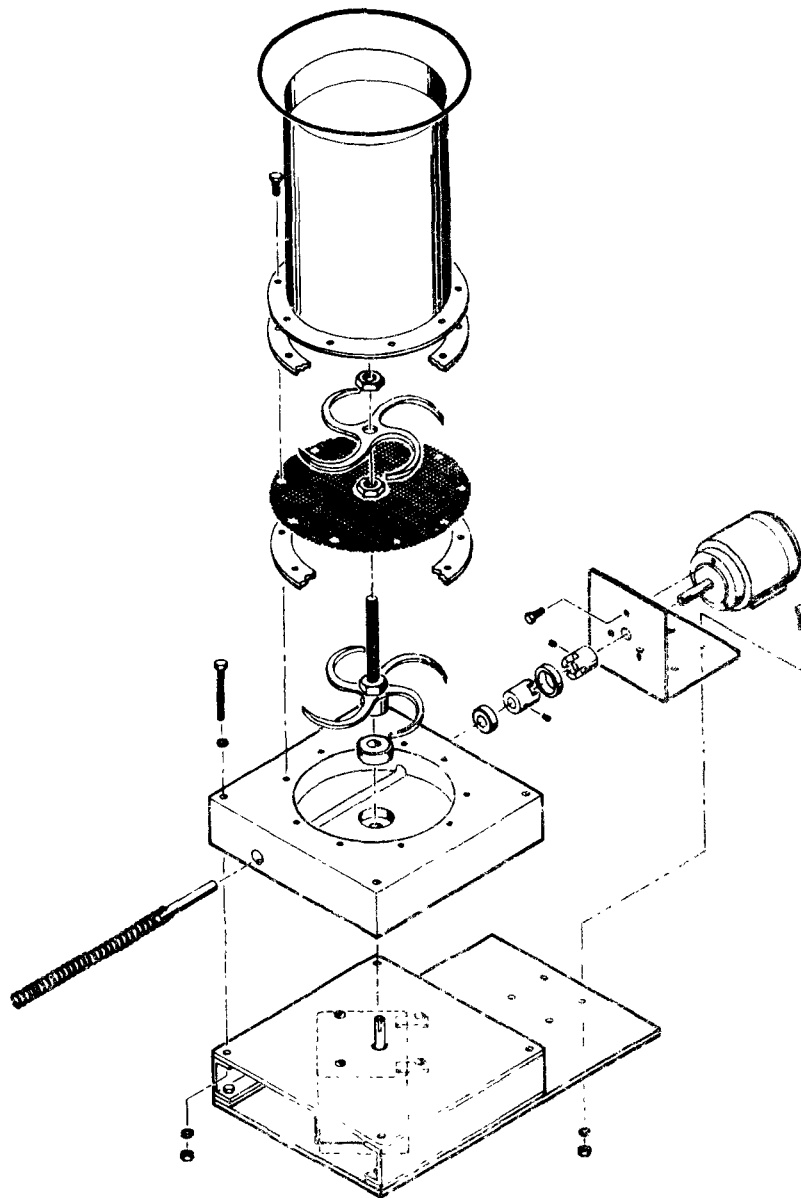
Exploded Drawing of the Automatic Dust Feeder
